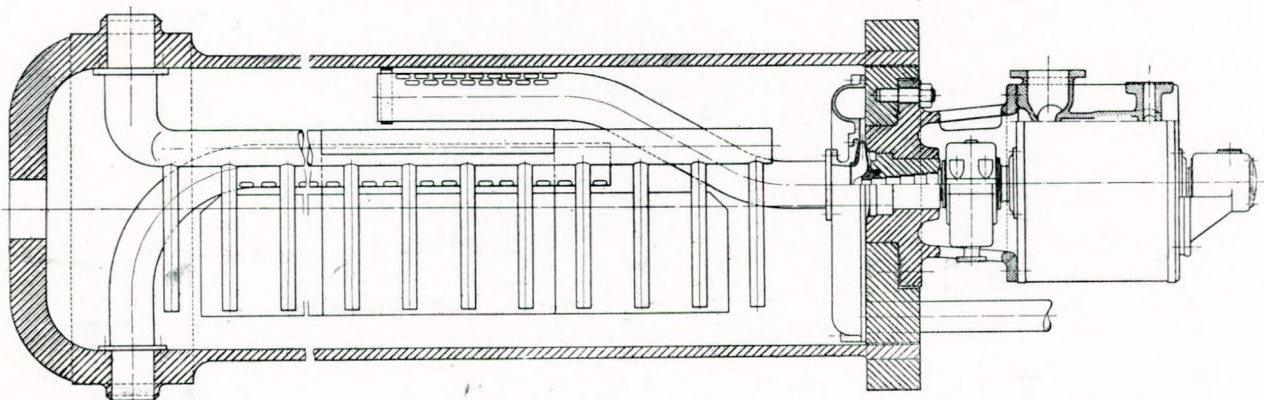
Evaporator drum with steam circulating pump for marine boilers.
